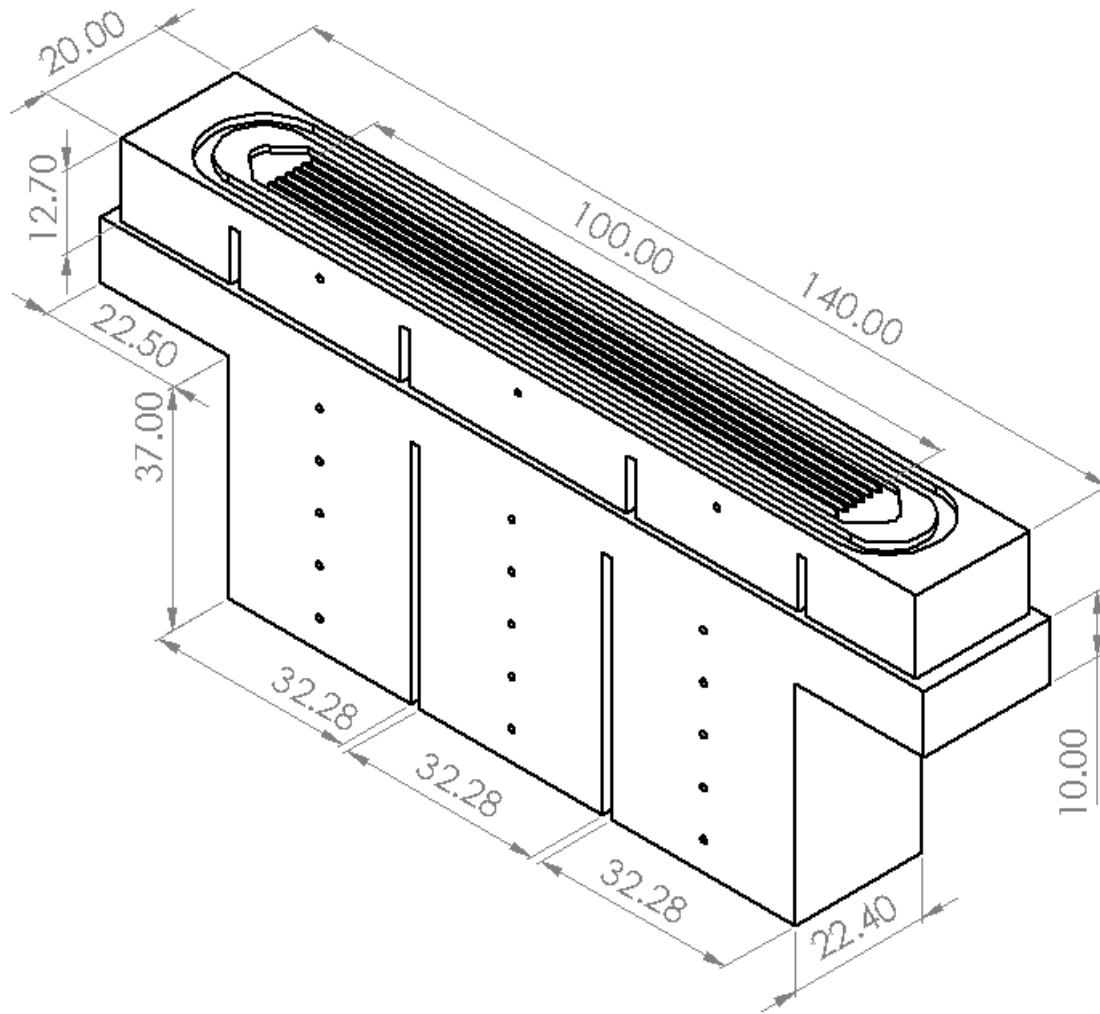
Schematic of test section assembly showing square channel test coupon and three segment heat flux block
